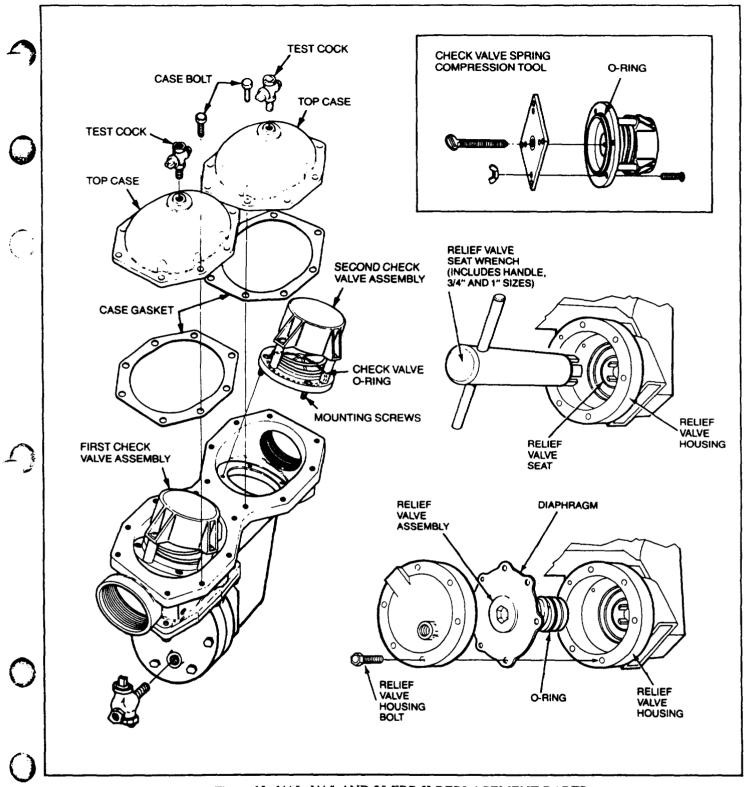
11/4", 11/2" AND 2" FRP II REPLACEMENT PARTS
